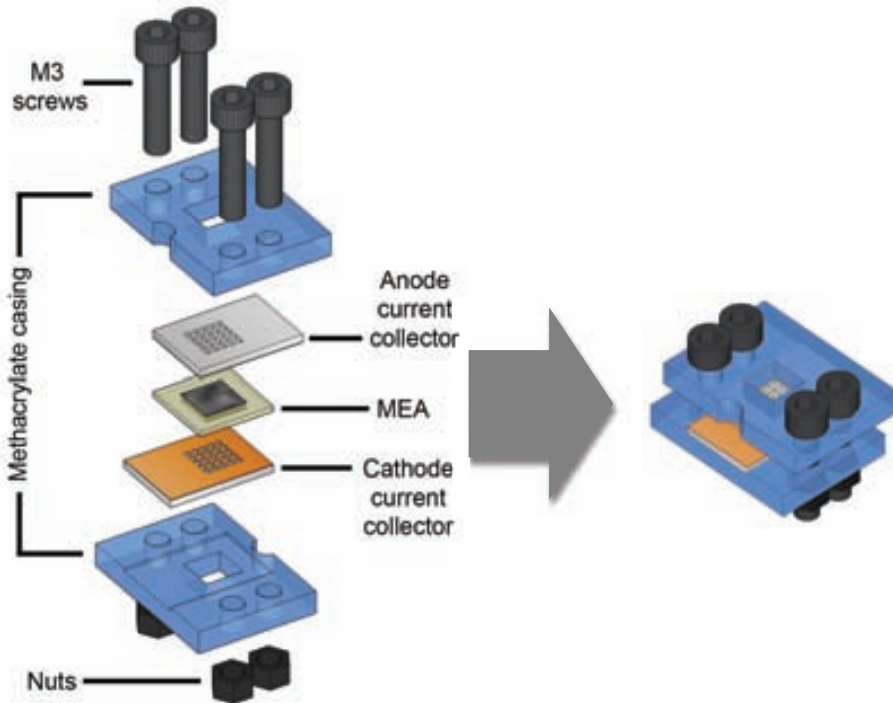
Hybrid micro fuel cell parts and assembly.
